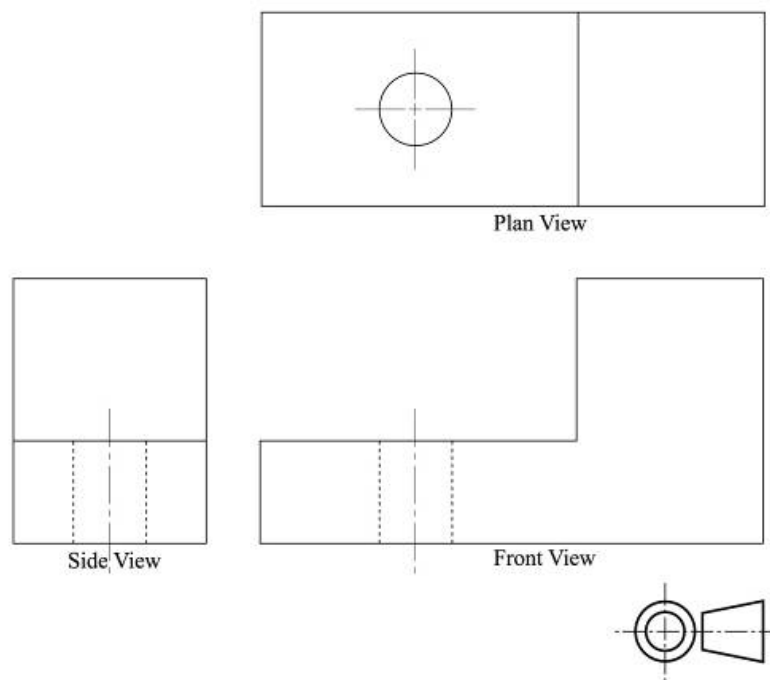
Third angle orthographic drawing of 'L' shape design block
